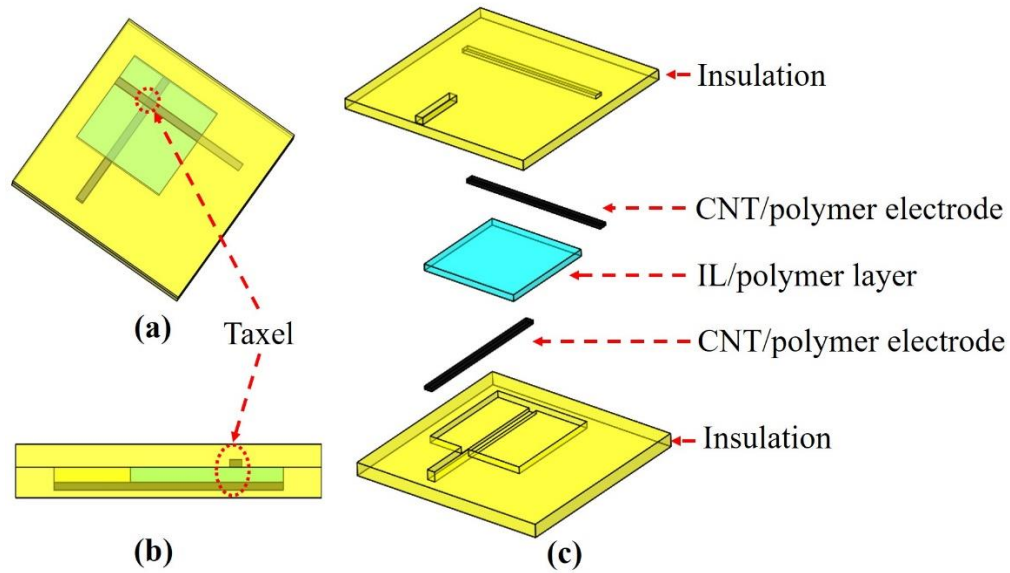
Design of a single taxel sensor for planar 3D printing: (a) 3D model of the sensor; (b) schematic diagram showing a side view of the sensor; (c) exploded view of the sensor showing the individual layers.
